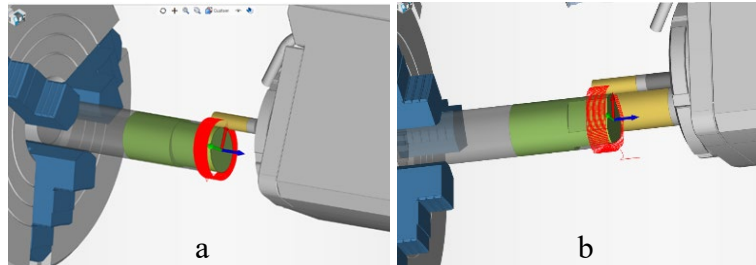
Simulation of Profiling Contouring Milling Horizontal (a) P2; (b) PC3
